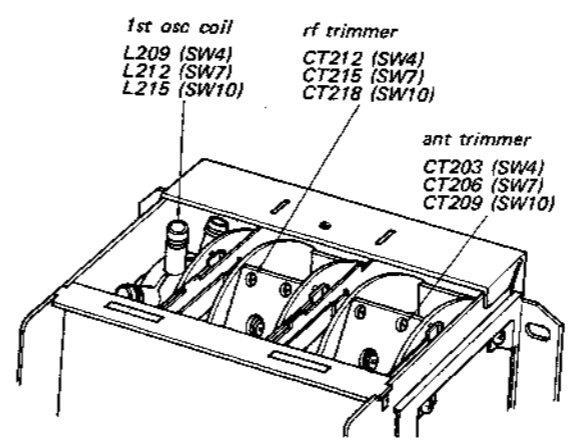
Adjusting parts for SW4, SW7, SW10
